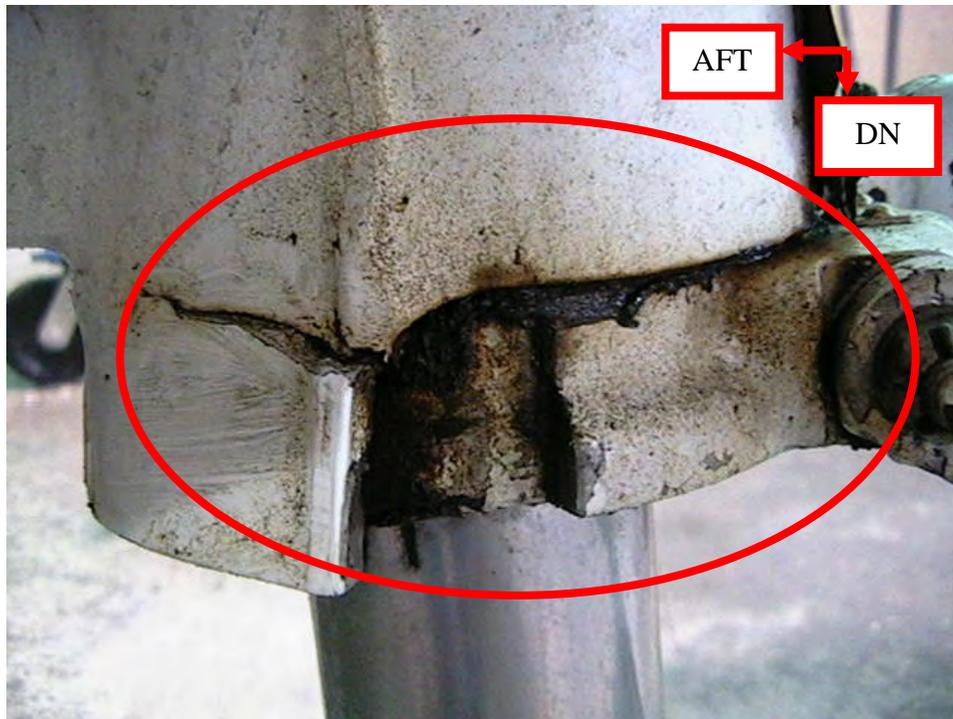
Nose Landing Gear Strut Housing Cracked FS 25, WL 32, and RBL 2
